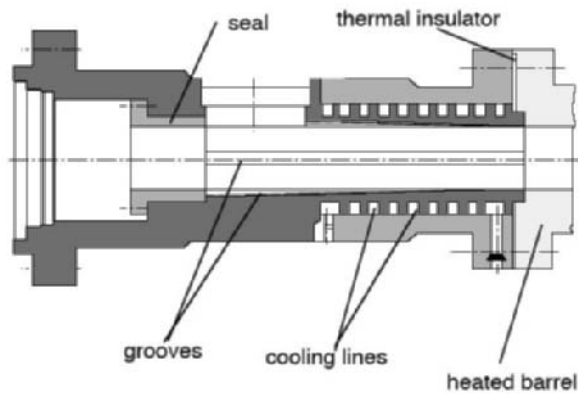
Schematic diagram of the grooved feed section of a single screw extruder.
